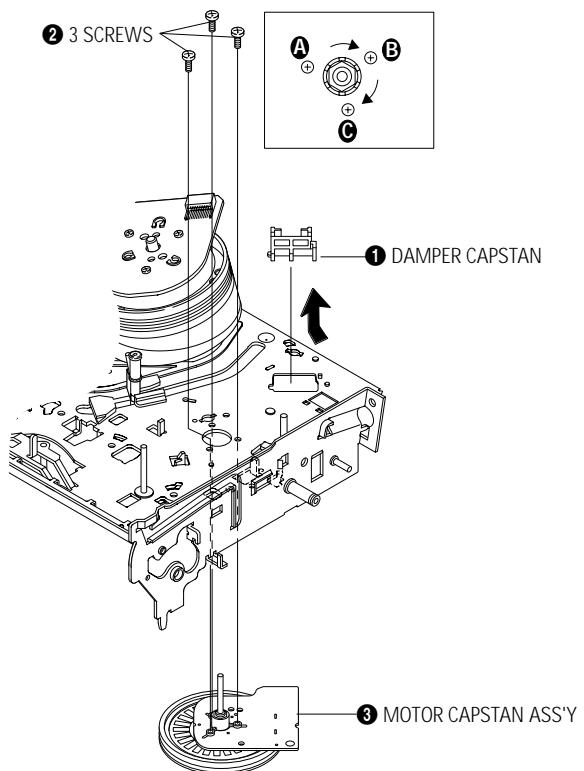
Damper Capstan, Motor Capstan Ass'y Removal
